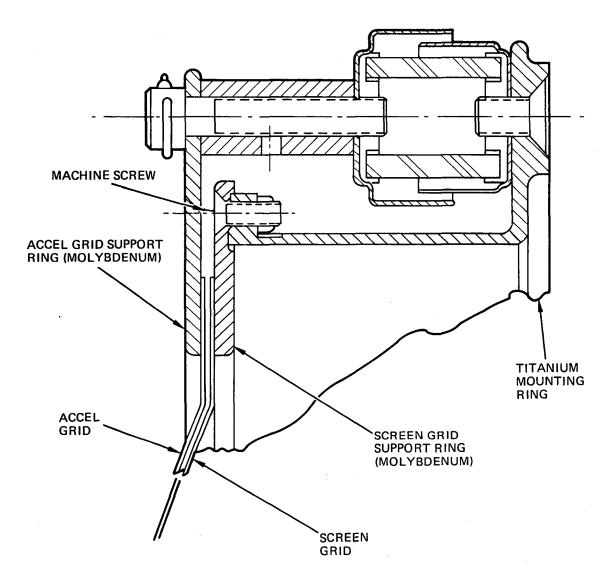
Detail of 30-cm, J-series grid mounting to support ring.
